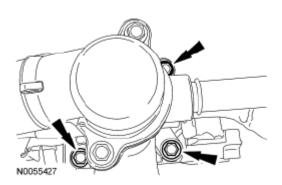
Locating Fuel Rail Bolts Courtesy of FORD MOTOR CO.
